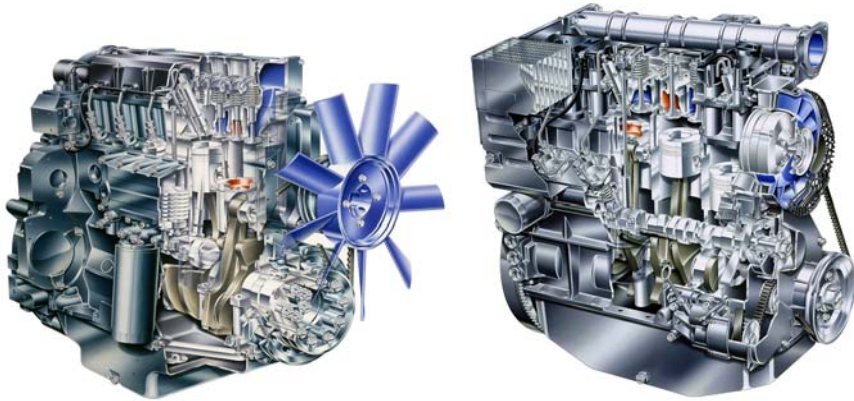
Cutaway of an in-line six cylinder diesel engine (Courtesy Deutz AG)
